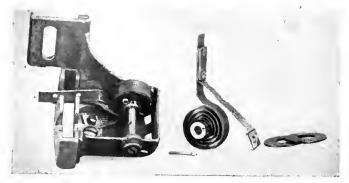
Spindle and duo-cotter-pin type adjusting mechanisms used with Westinghouse No. 508 railway motor brush-holder
